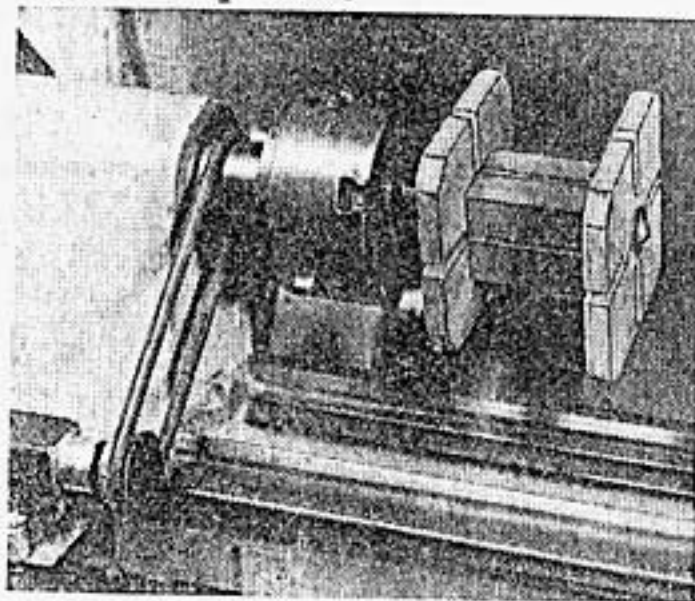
Coil form is held together with a $\frac{1}{4}$ in. bolt which is clamped in the lathe chuck. Grooves in the block and slots in the side pieces allow strings to be passed through for tying.
